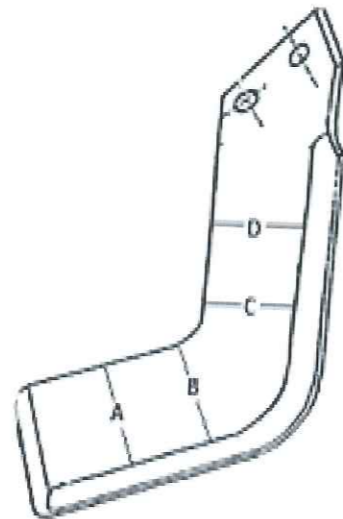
DIMENSIONS OF BLADE FOR WEAR ANALYSIS
